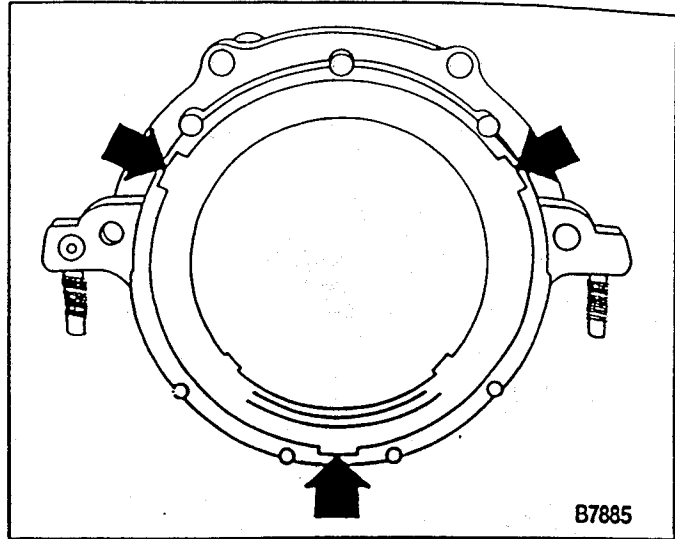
Seal Removal Notches (5.0 and 5.7L Engines)
